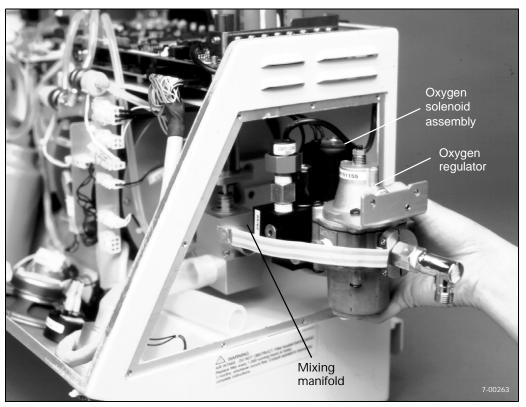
Removing oxygen regulator/oxygen solenoid assembly
